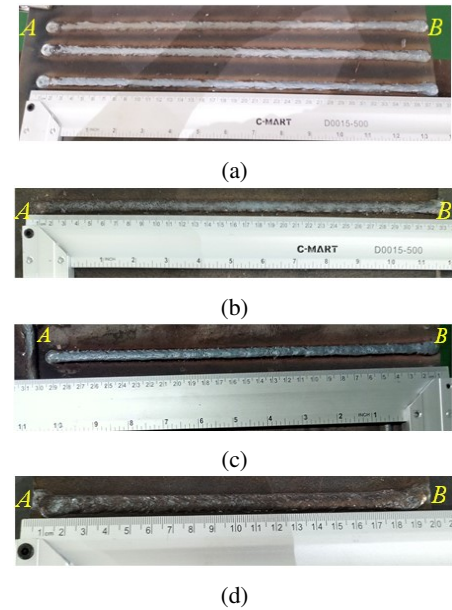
(a) Triple 38 cm welding path; (b) 33 cm welding path; (c) 30 cm welding path (c); (d) 20 cm welding path.
